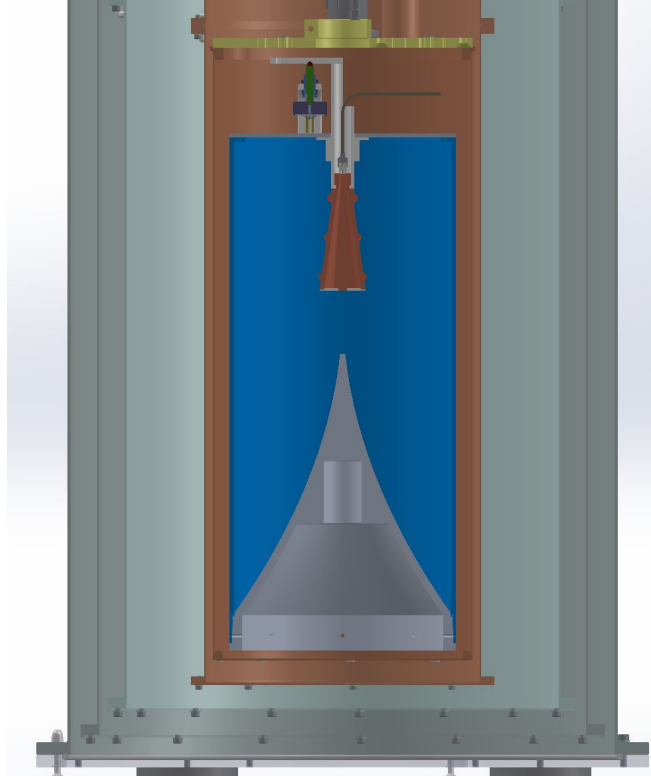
Cross section of GigaBREAD assembly integrated in the ProteoxS dilution fridge.
